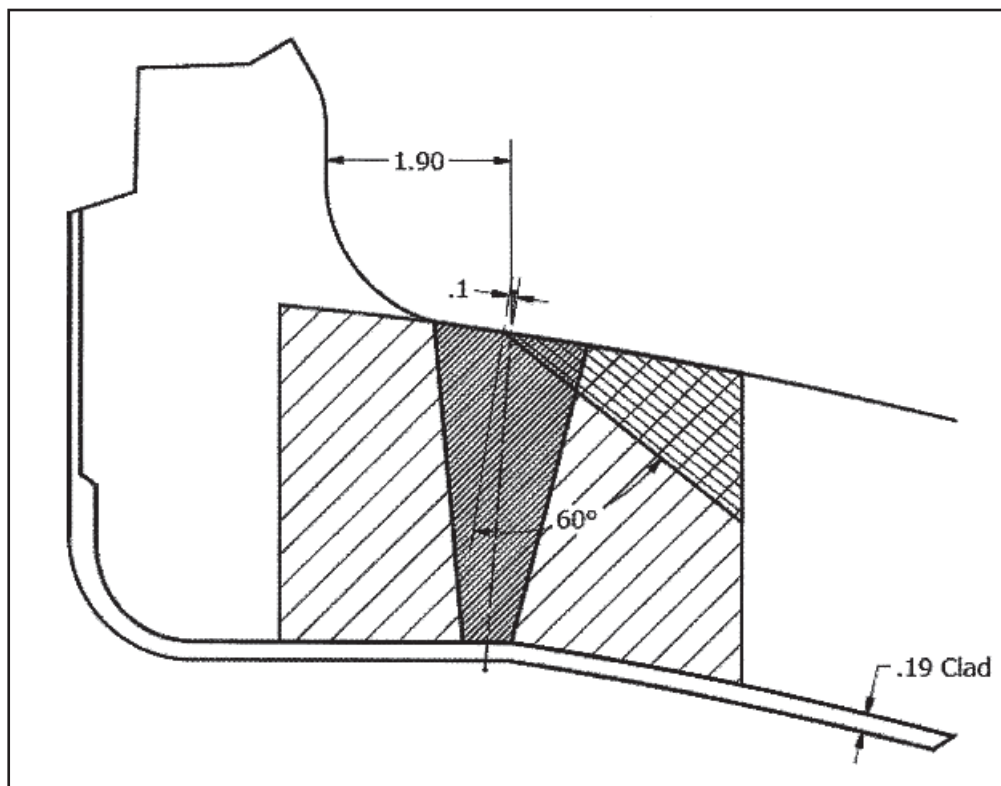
Weld WP-11, 60° Nozzle Side Axial Scans
